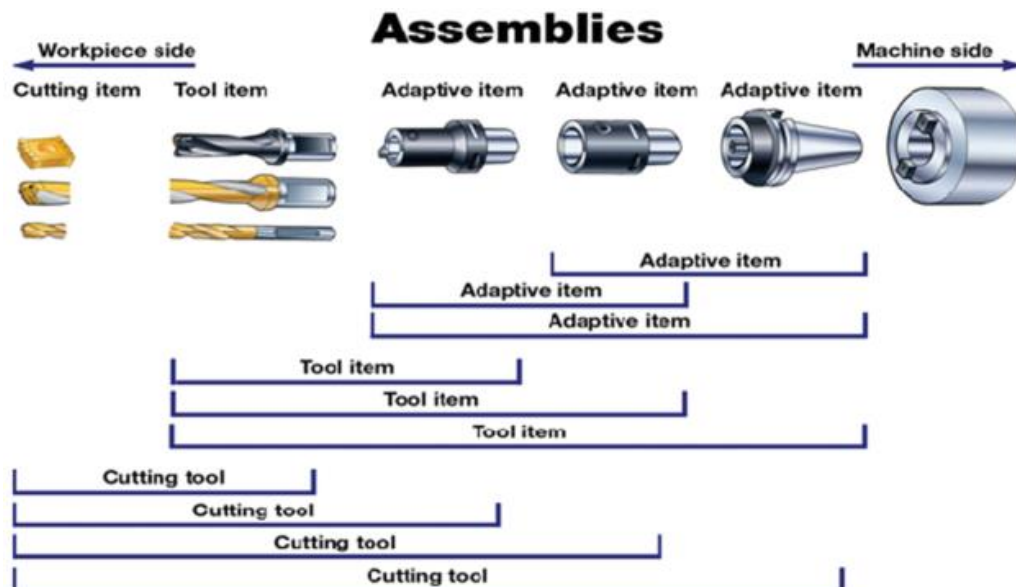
Possible assemblies of components of a cutting tool (ISO/TS 13399-50:2013 2019).
